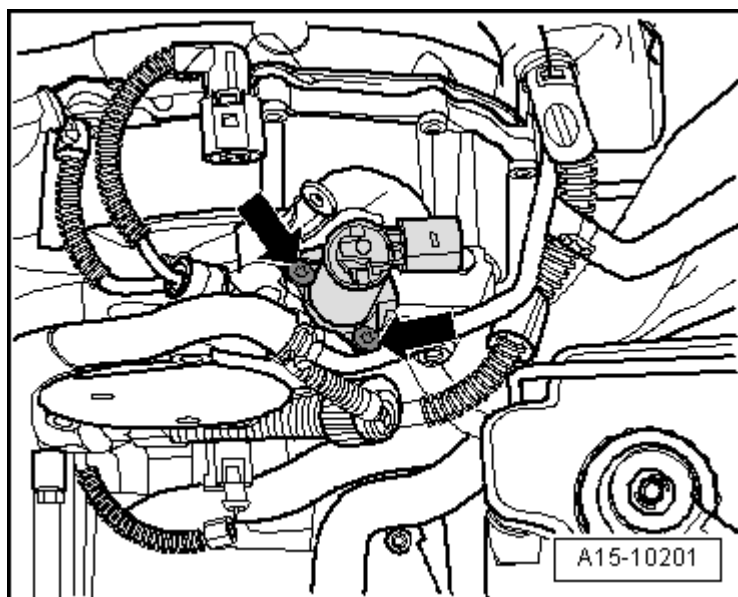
Identifying Camshaft Adjustment Valve 1 N205 Bolts
